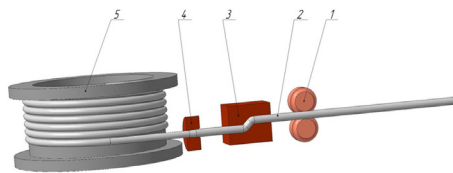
The scheme of the combined process "ECAP-drawing": 1-setting device; 2 – wire; 3 – equal-channel step matrix; 4 – a drawing die in the die-head block; 5 – drum [47].
